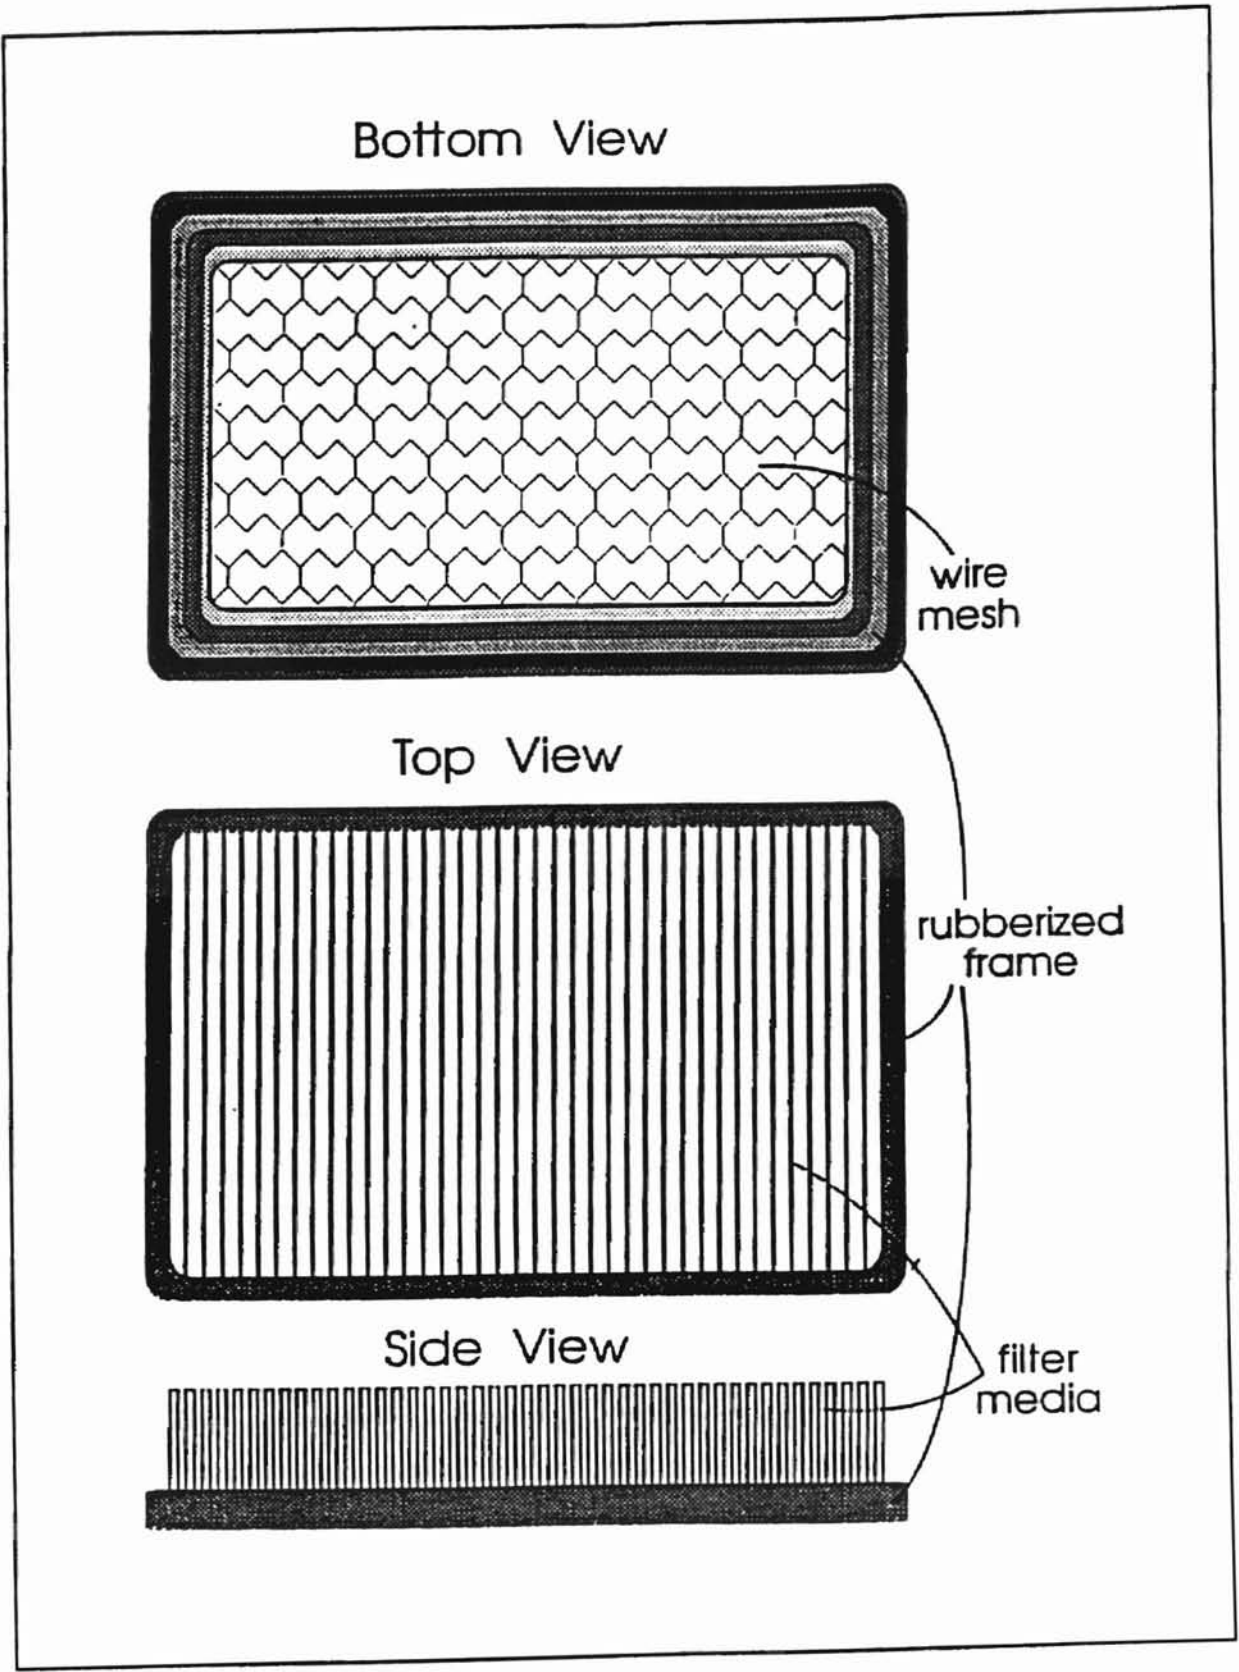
Schematic Drawing of the Model A13912 Test Filter.
